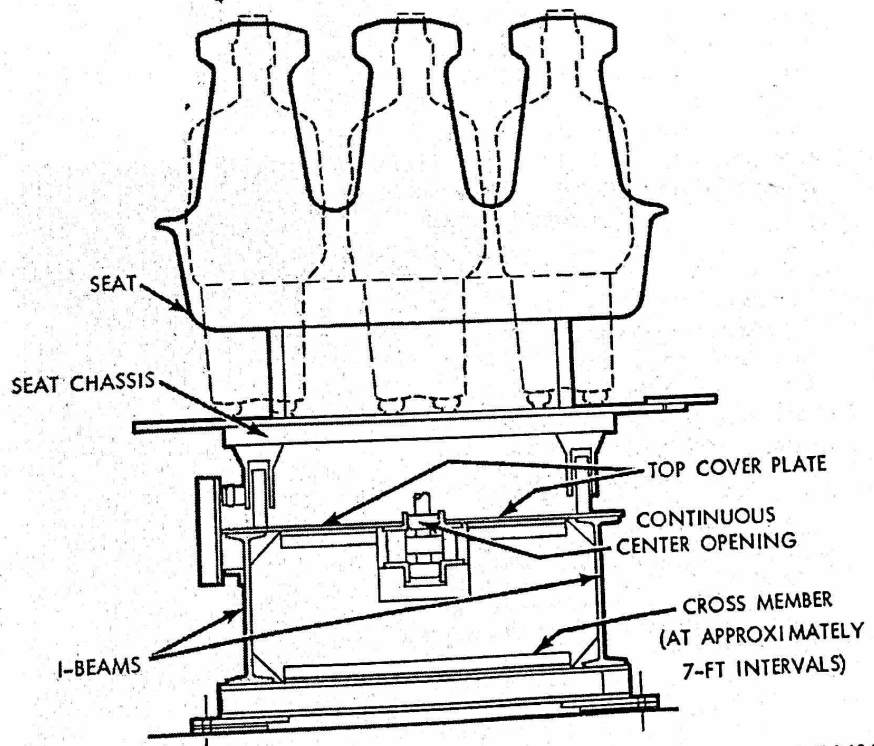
The Futurama II ride track, shown in this cross section drawing, consists of two parallel 18-in. steel I-beams spaced 44 in. apart. The I-beams are topped with a 1/4 in. steel plate having a continuous center opening.
